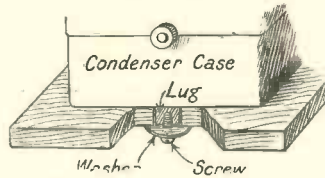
DETAIL SHOWING CONDENSER FIXING.
